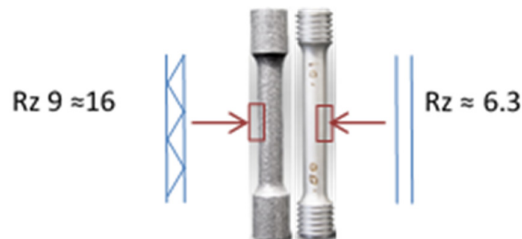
As built' (left) and 'machined' (right) test specimens to be used in tensile test
